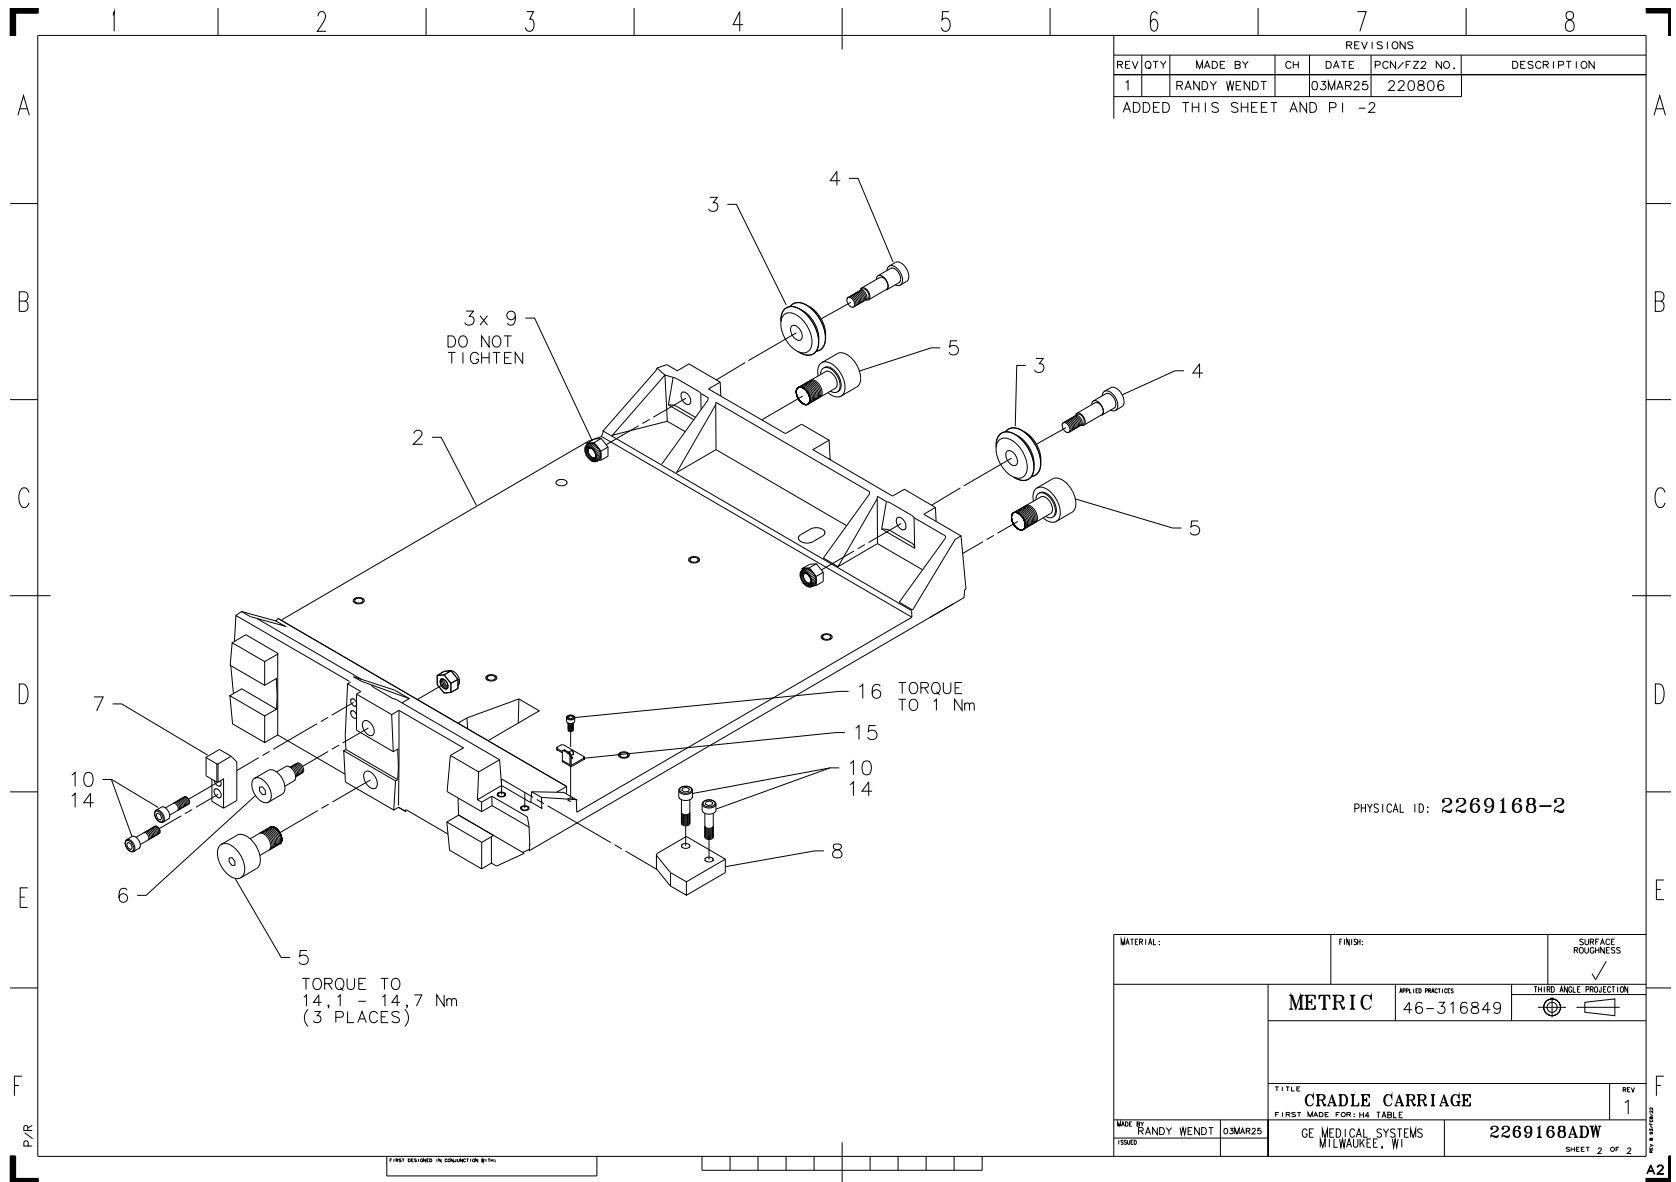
Carriage Assembly (2269168-2, sheet 2, rev1)
